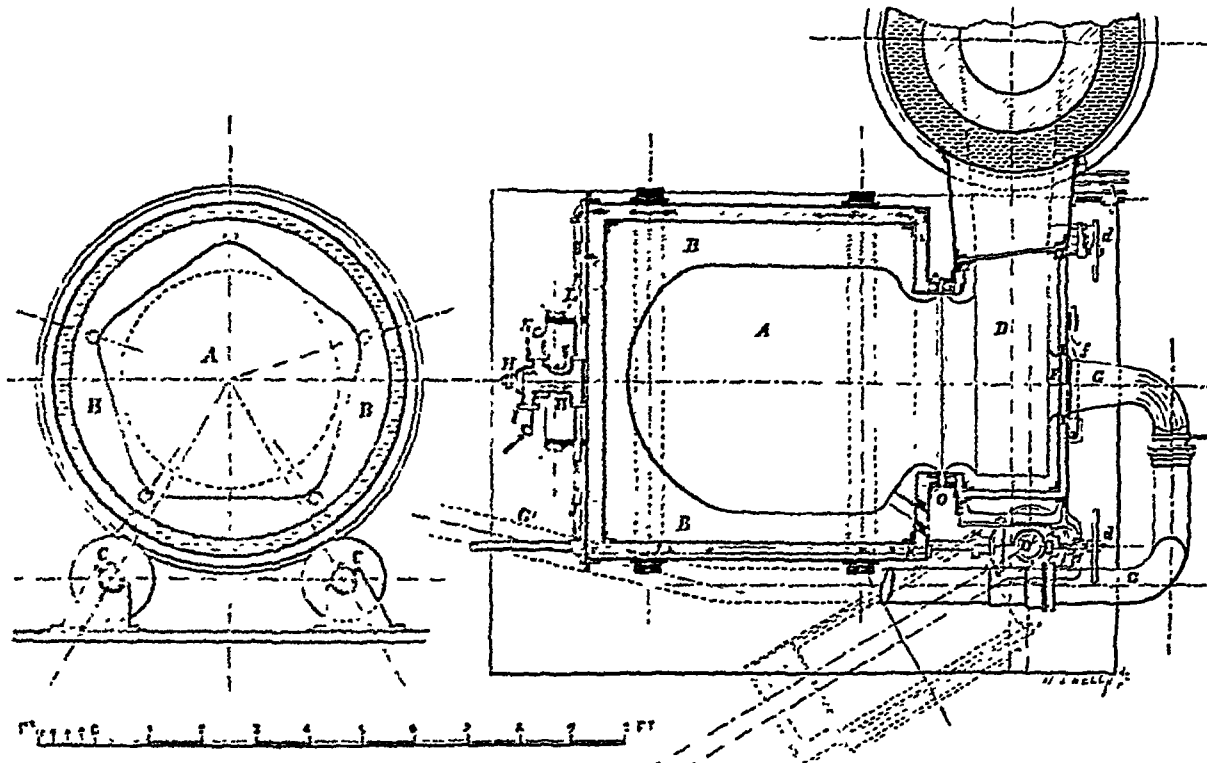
Crampton's Revolving Puddling Furnace—Cross Section and Sectional Plan.
